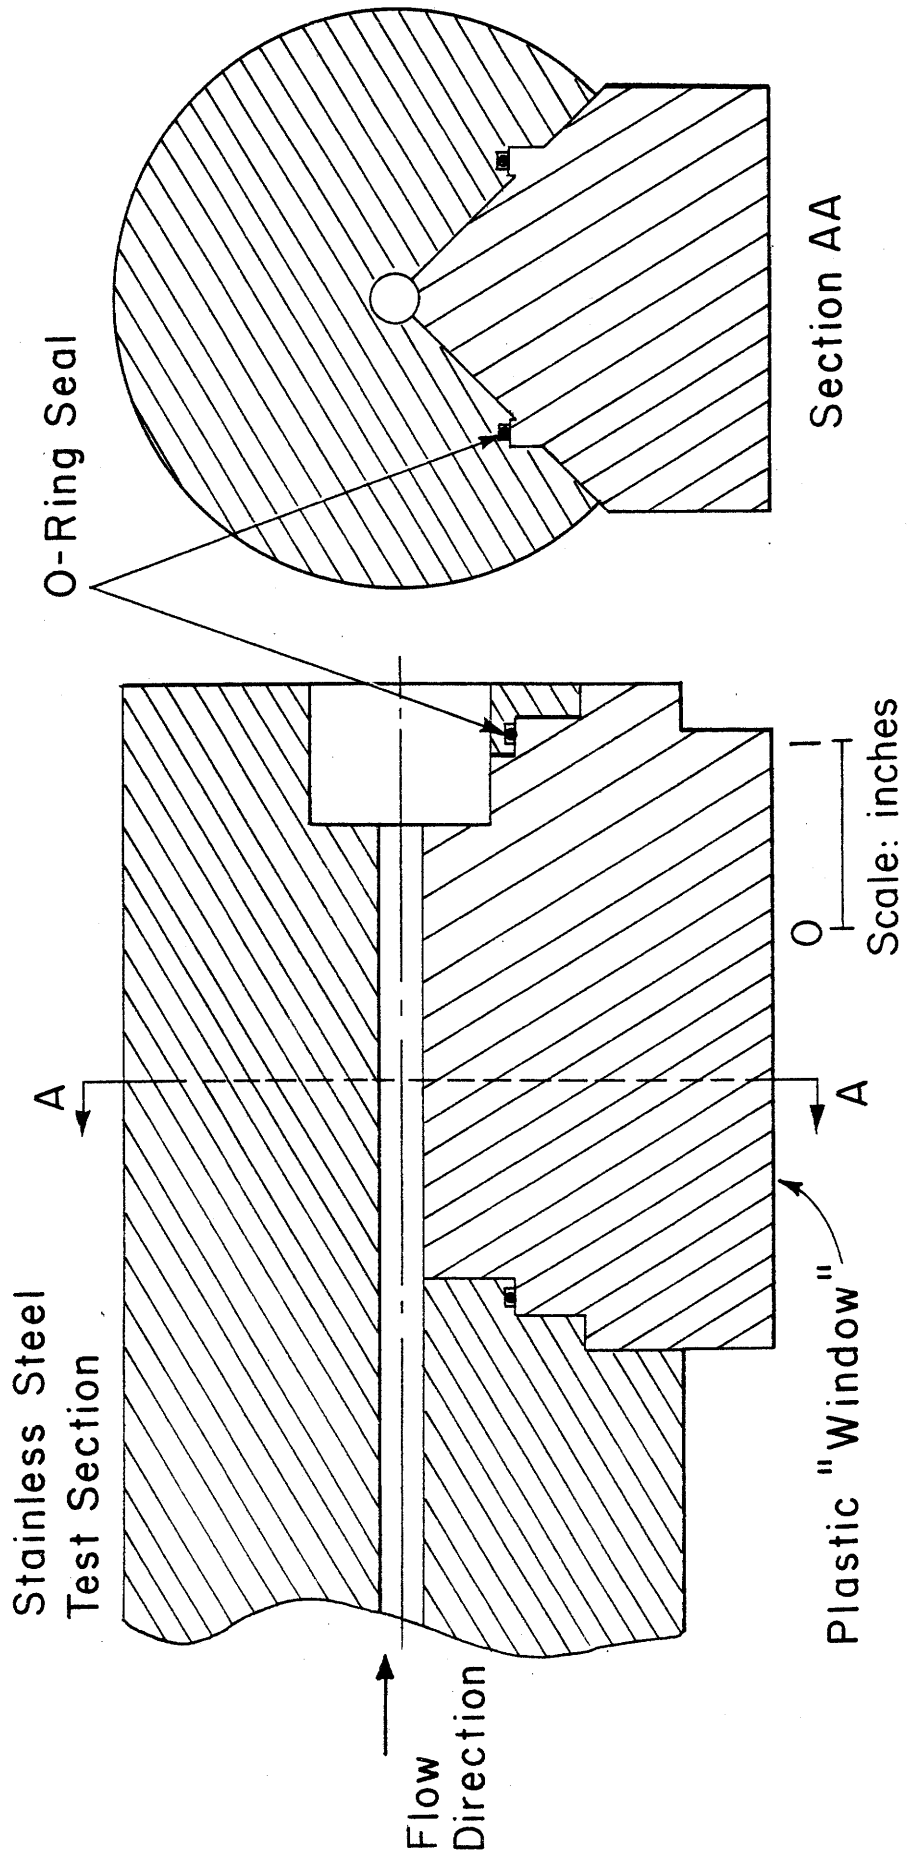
DETAILS OF PLASTIC VIEWING SECTOR
